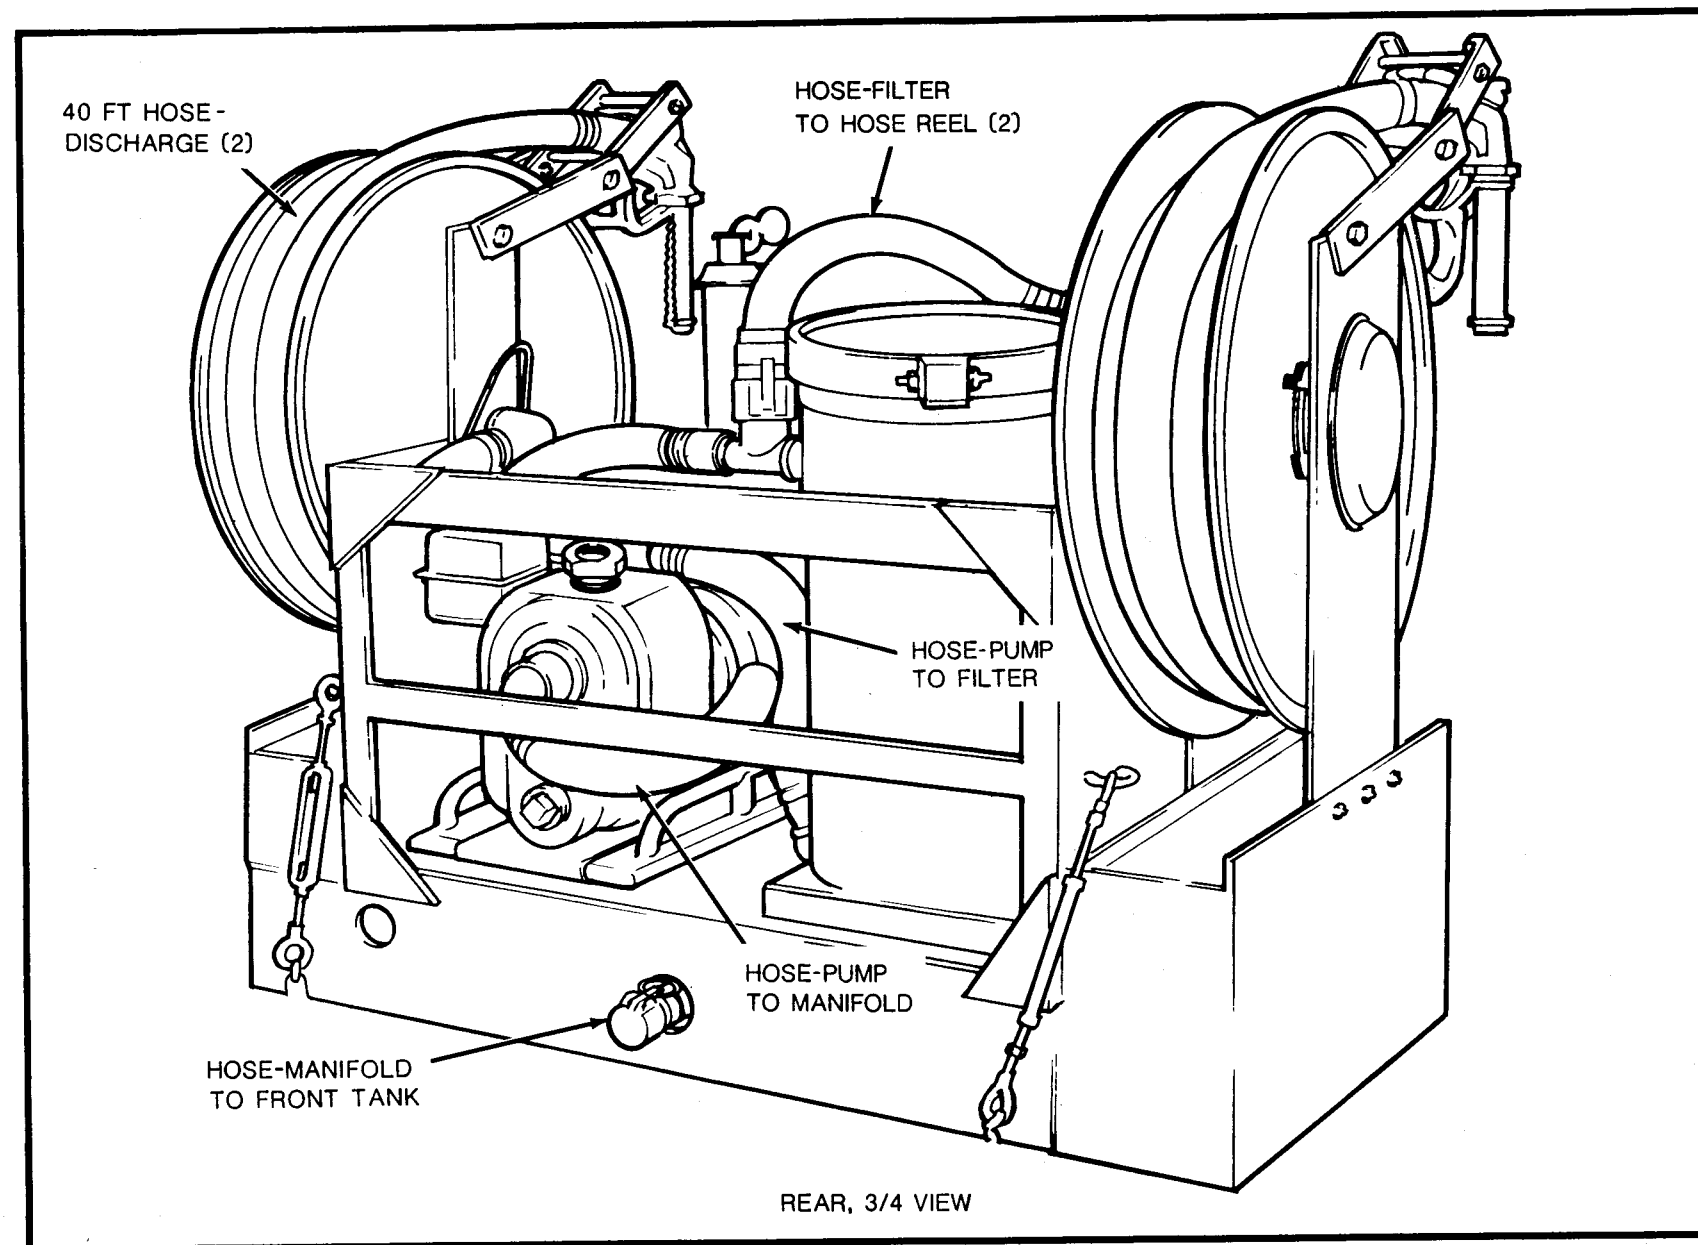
Pumping assembly, front and rear, three-quarter view. (sheet 2 of 2).
